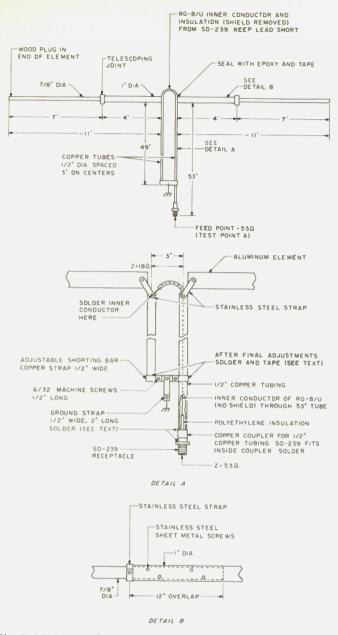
LB-2 array for 15 meters. Use same matching section for 10 meters but see Table 1 for shorting bar position. General dimensions of driven element are shown. Detail A shows matching section. Detail B shows method for joining element sections.
